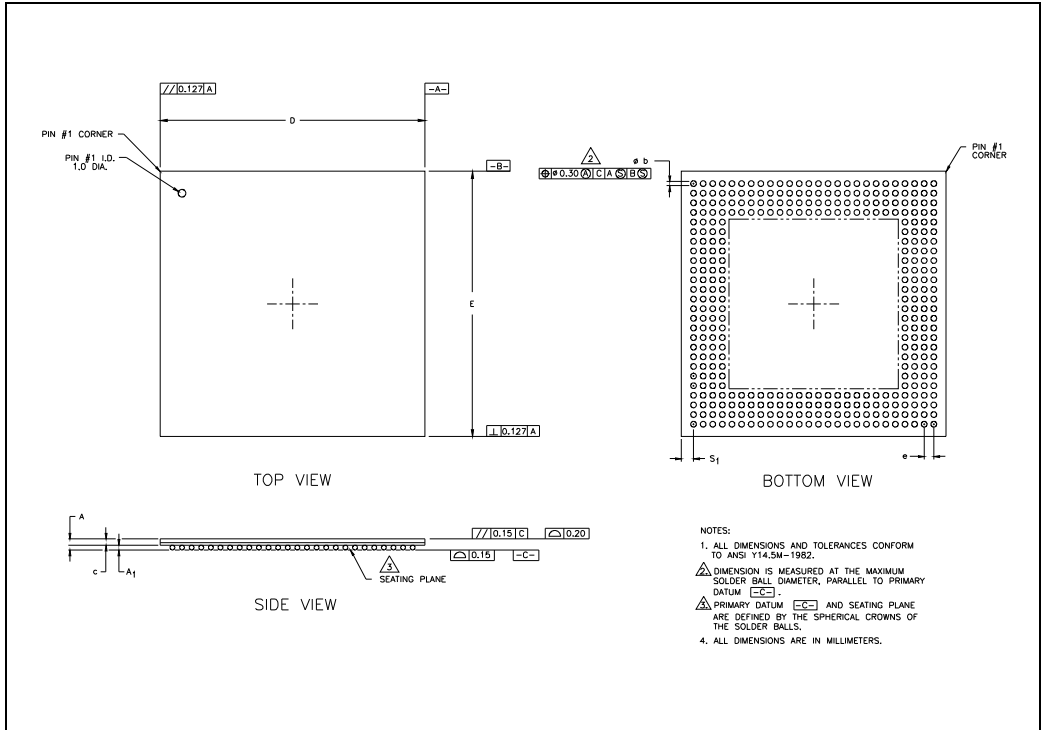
HL-PBGA Package Outline and Ball Configuration
